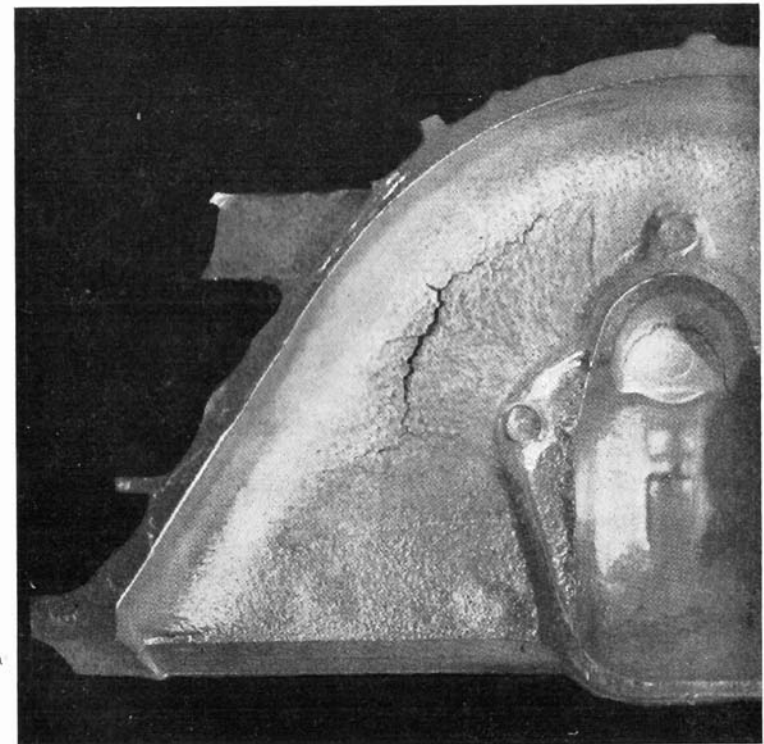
A contraction crack formed in an aluminium alloy die casting during cooling in the mould after solidification was complete.
